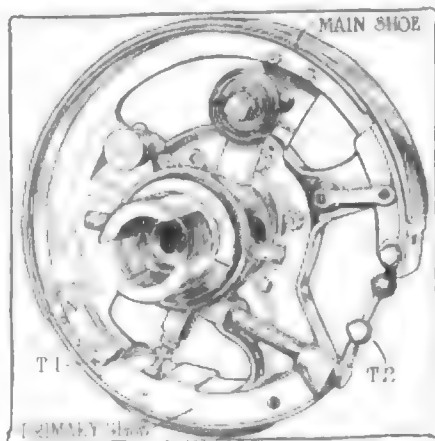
ADJUSTMENTS ON RAMBLER CLUTCH
